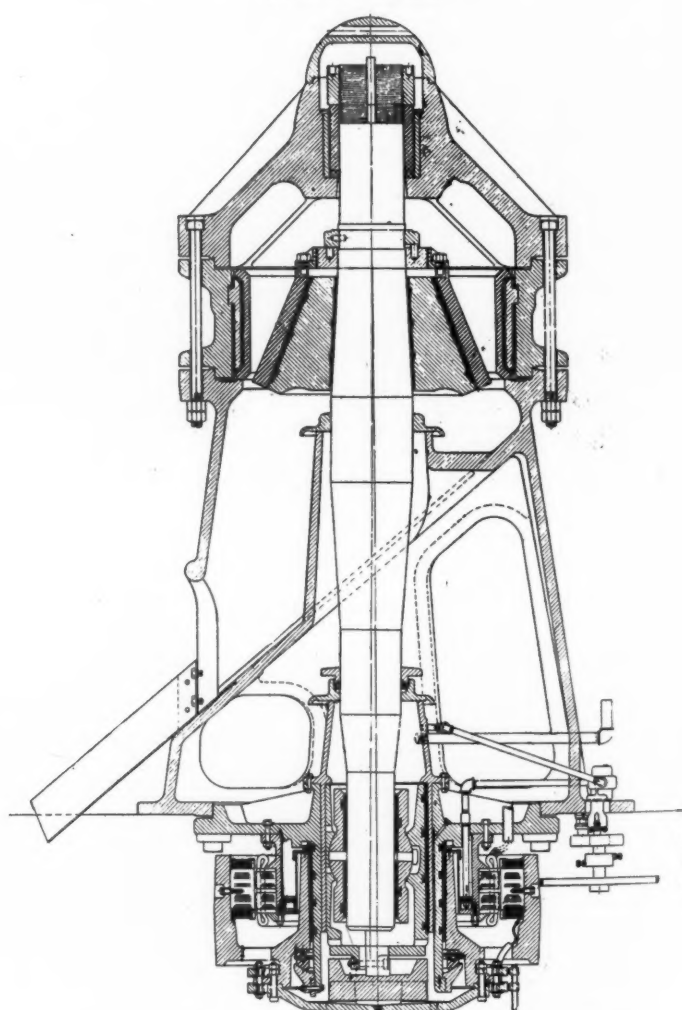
Kennedy reduction crusher with attached electric motor drive
